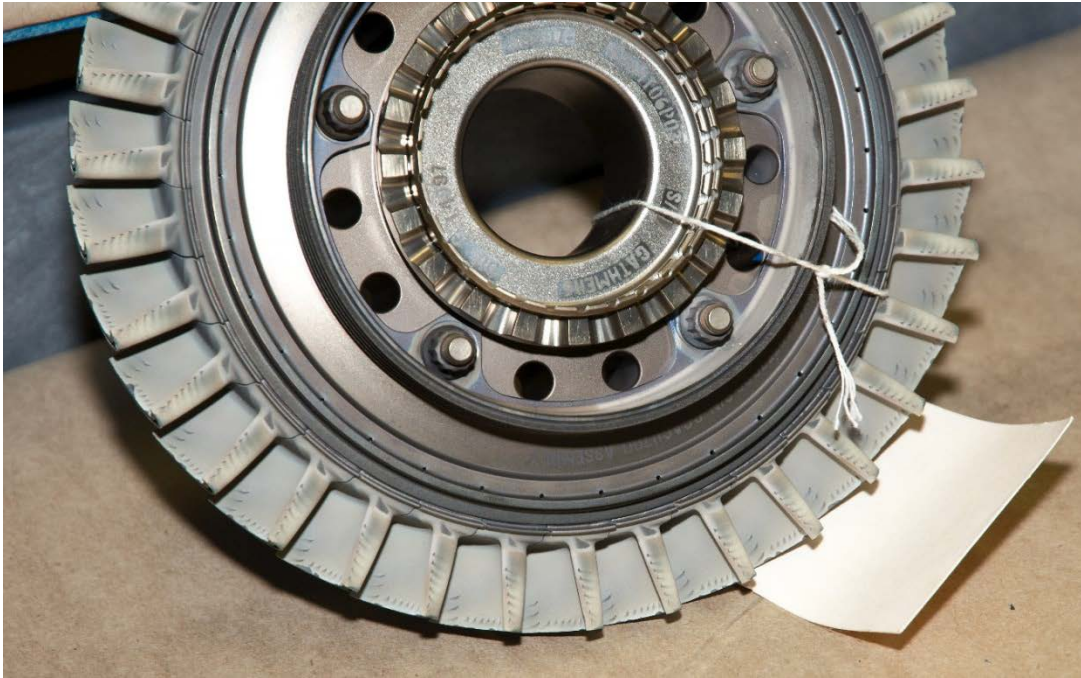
T700-GE-701D/CC Stage-1 Gas Generator Turbine Rotor (Pre-Test)
